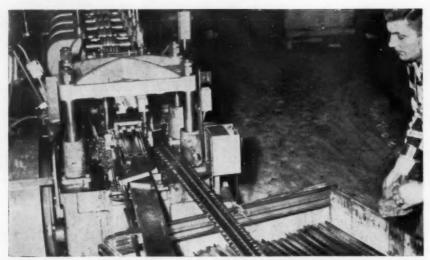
Strips ready formed being discharged automatically into a tote box from the rolls in the background. In the foreground is the flying cutoff and a shaft that reciprocates and is rocked to eject each strip.
